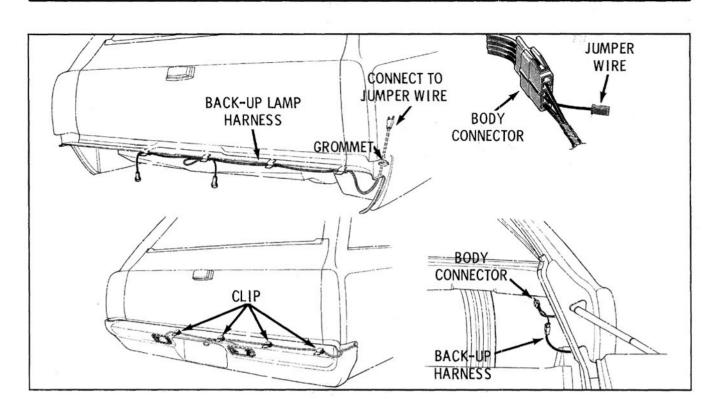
Back-Up Lamp Installation (S.W.)
